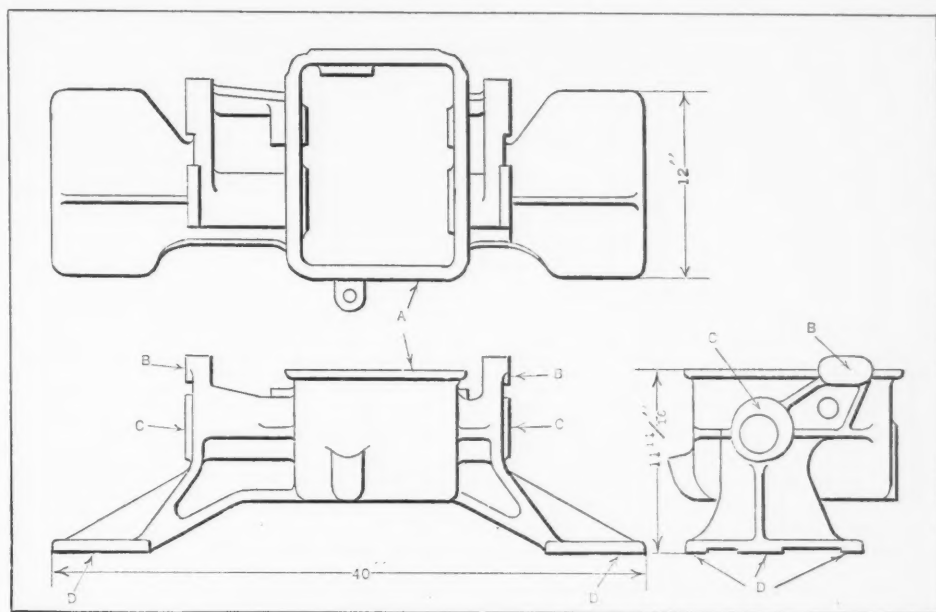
Outline Drawing of the Hoist Housing Machined with the Equipment Shown in Figs. 1 to 3
